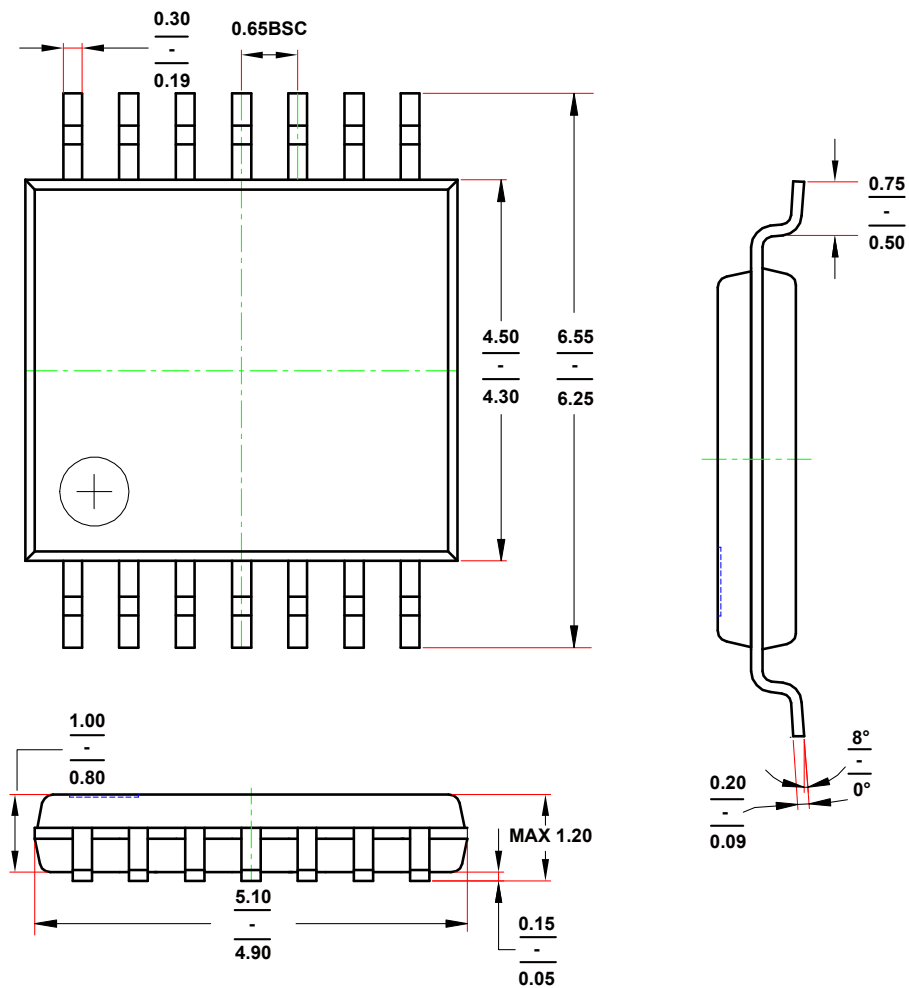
14-Lead TSSOP Package Dimensions shown in millimeters
